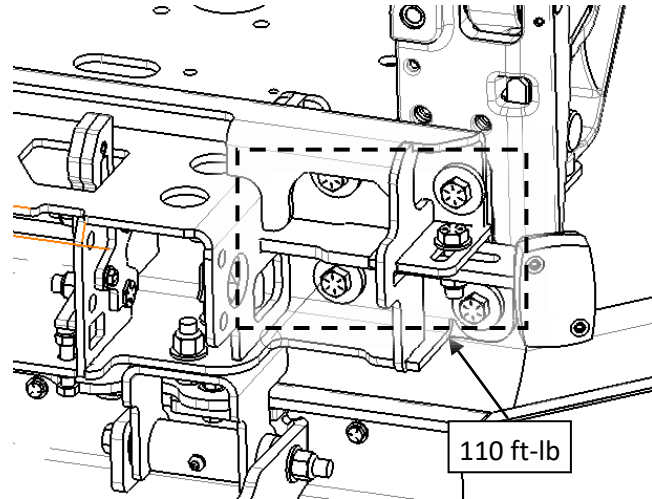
Side Bracket Bolt Torque Specs (Driver Side Shown)
